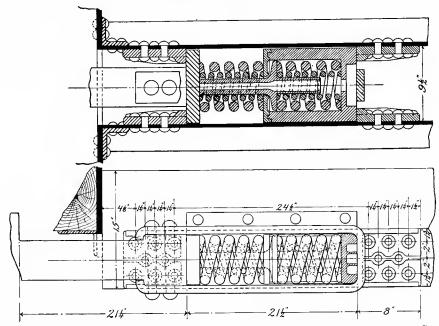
Butler Special Tandem Spring Draft Gear. Butler Drawbar Attachment Company.
